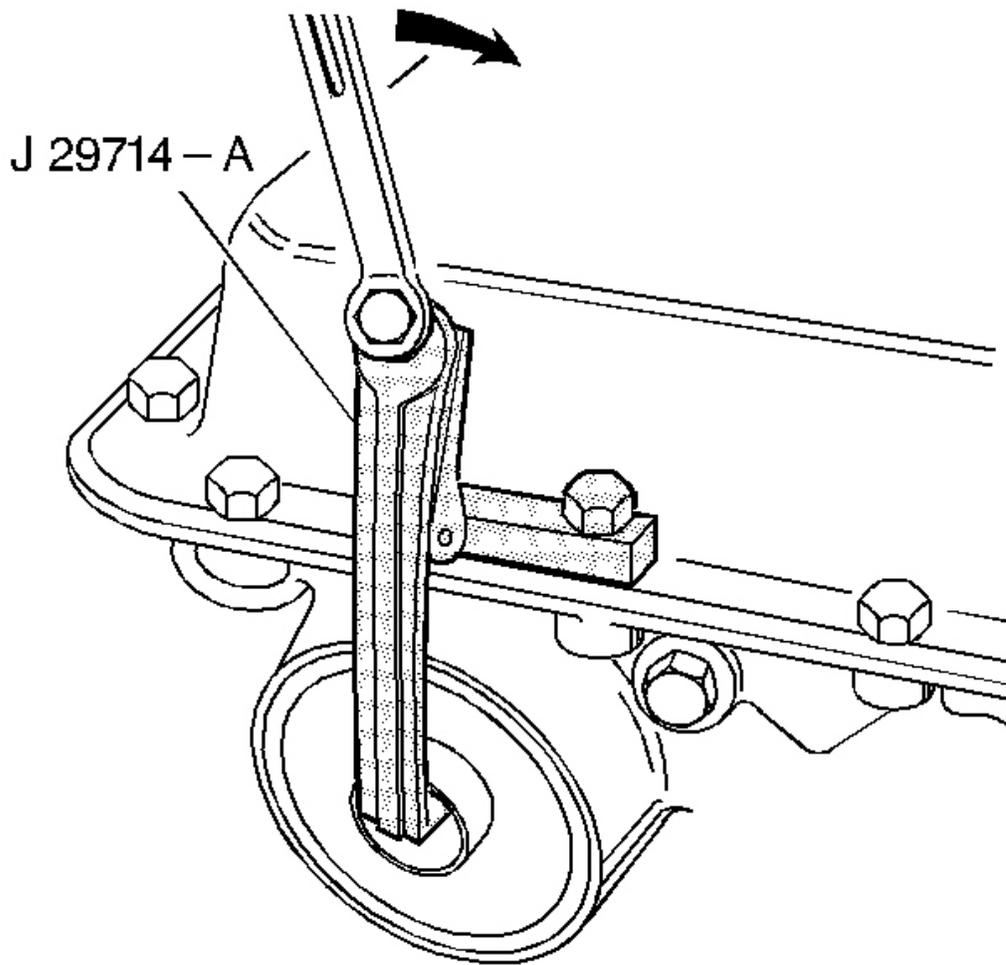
Tightening J 29714-A Bolt To Compress Servo Cover
